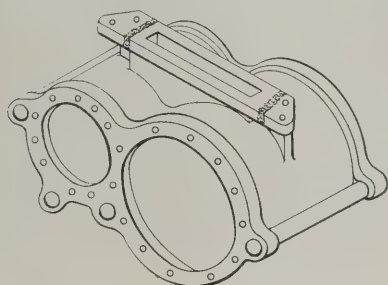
Air Cylinder Lugs Replaced by Gas Welding
